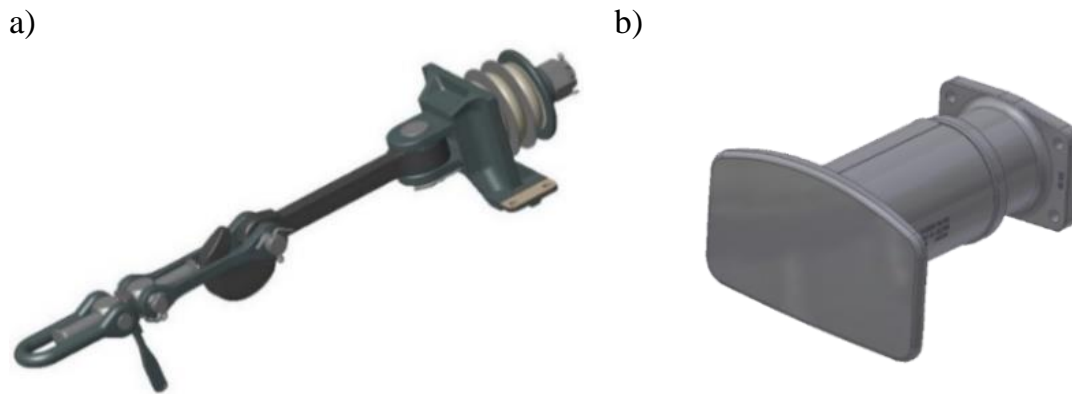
The draw- and buffing gear: a) screw coupling, draw hook and draw gear, b) buffing gear. Source: AXTONE S.A.
